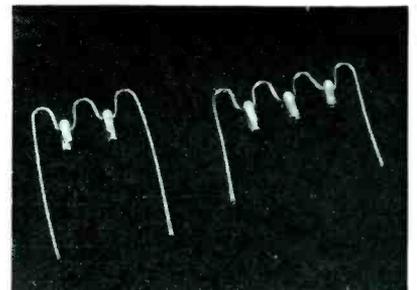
Tungsten heater wires with aluminum slugs in place ready for evaporation. Assembly at left is for ten-inch picture tube; at right for twelve-inch
